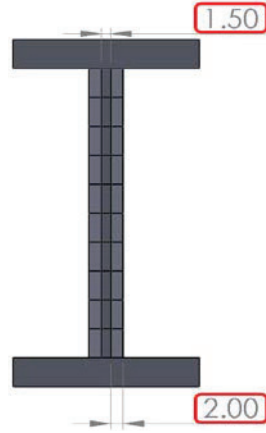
Solid plate CAD file showing an extrusion thickness of 2mm on a 1.5mm thick plate
